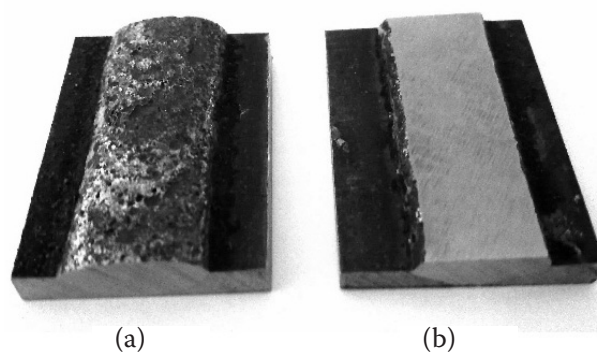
Sample after weld deposit and cuts from base material (a) and sample for abrasive wear resistance test (b)
